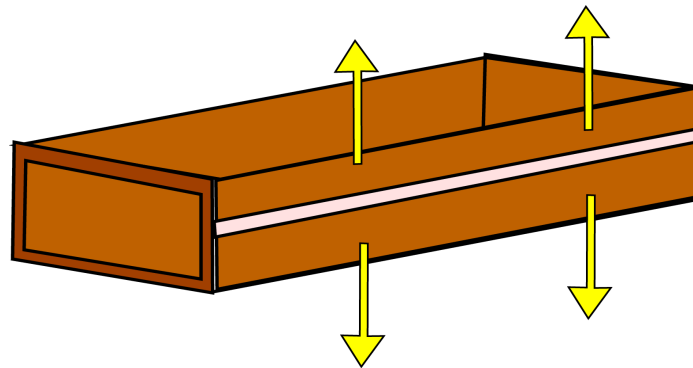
A different design solution giving symmetrical heat balance. The weld is shown in white.
